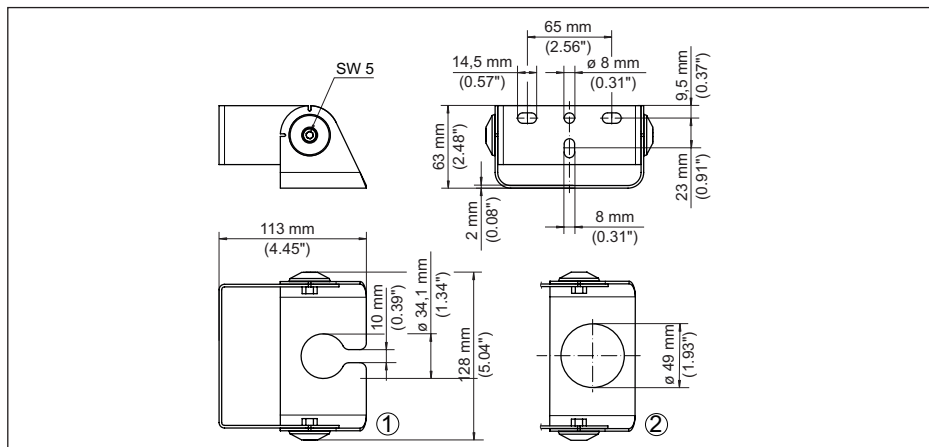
Mounting strap for wall mounting, adjustable - bracket 80 mm
